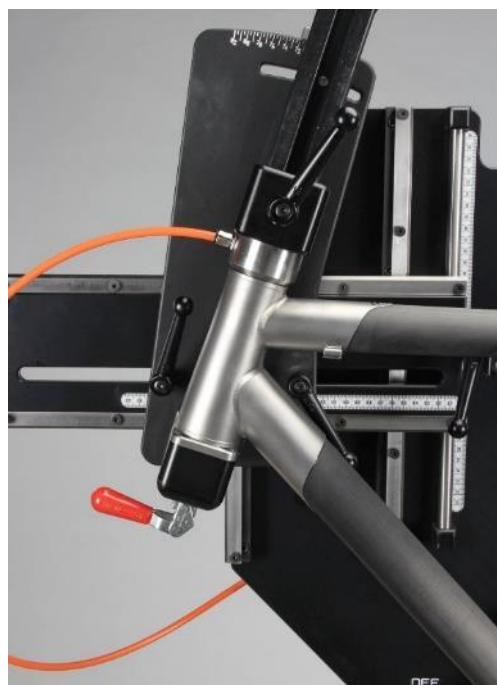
Head tube holding unit of Sputnik tool frame fixture
